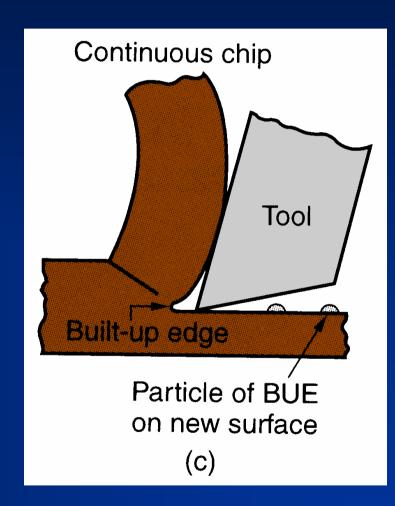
Four types of chip formation in metal cutting: (b) continuous
